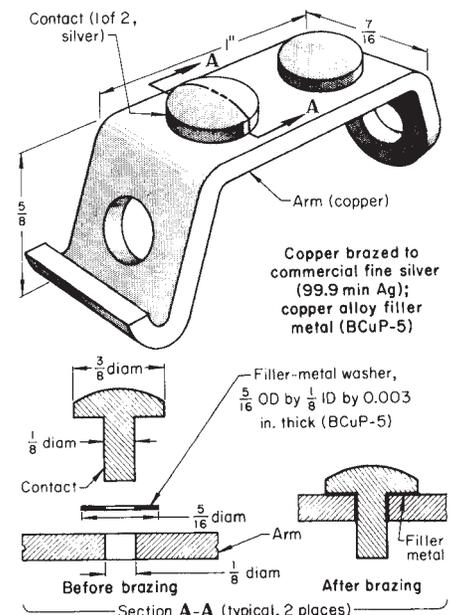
Furnace brazed contact arm assembly. Brazed without protective atmosphere, 42 °C (75 °F) below the liquidus of the filler metal. Dimensions in inches
